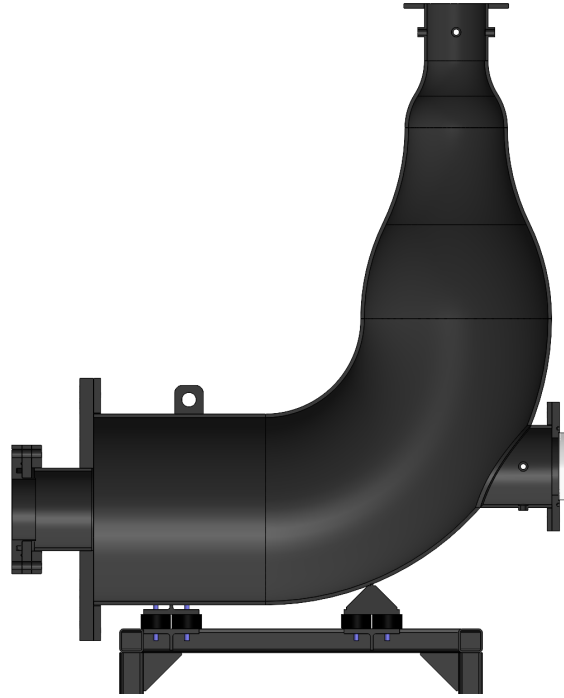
Coupled exhaust vessel and afterburner. The RDC is not shown but would be to the left of the image.
